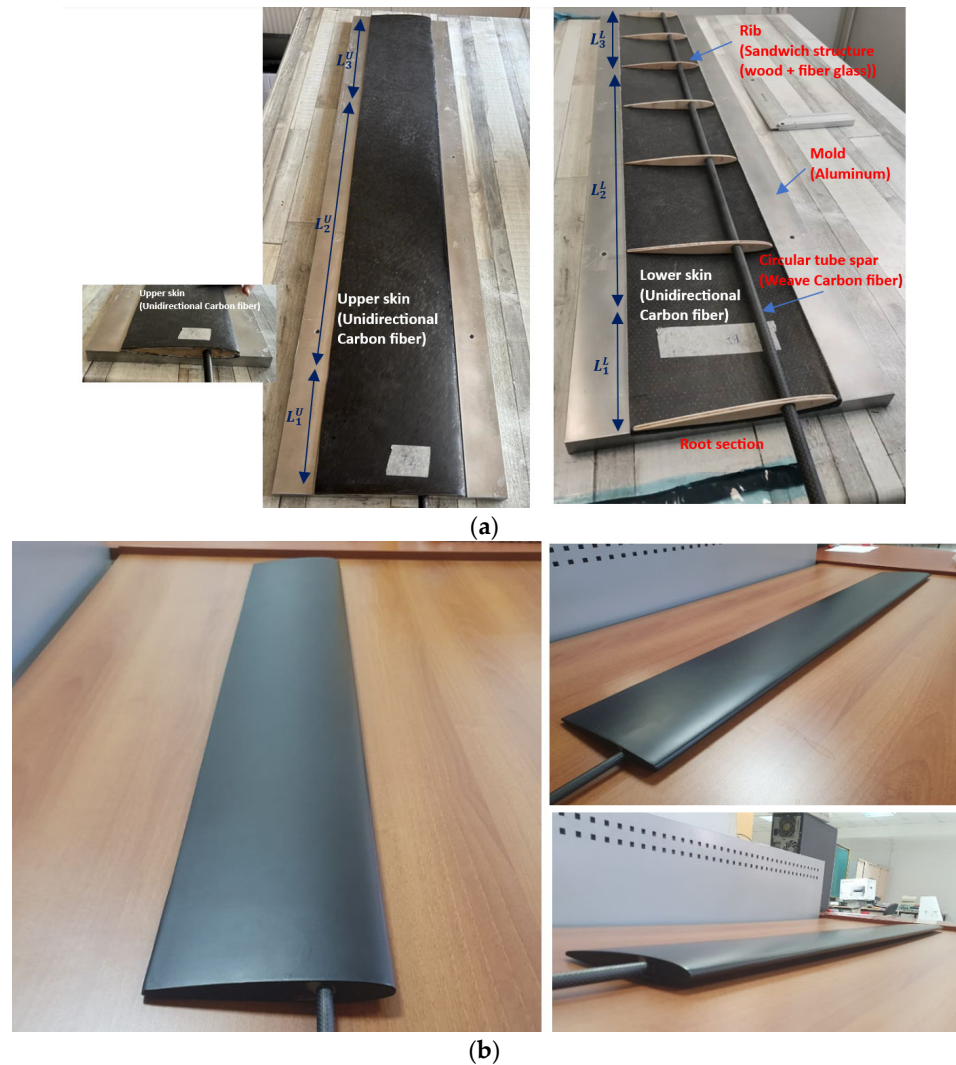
(a) Composite wing parts assembly and (b) Final views of the composite wing.
